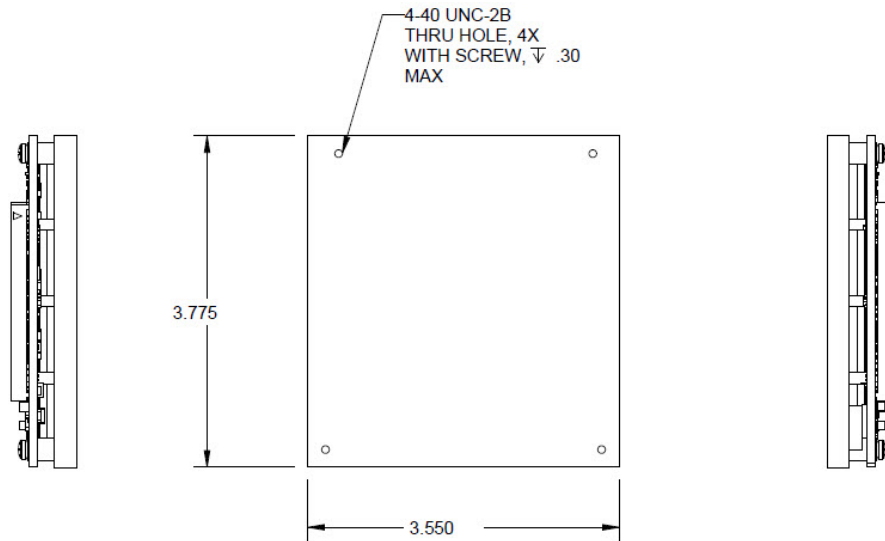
ESS-3300-24T-CON-E (Expansion Board with Cooling Plate)—Bottom and Side View
